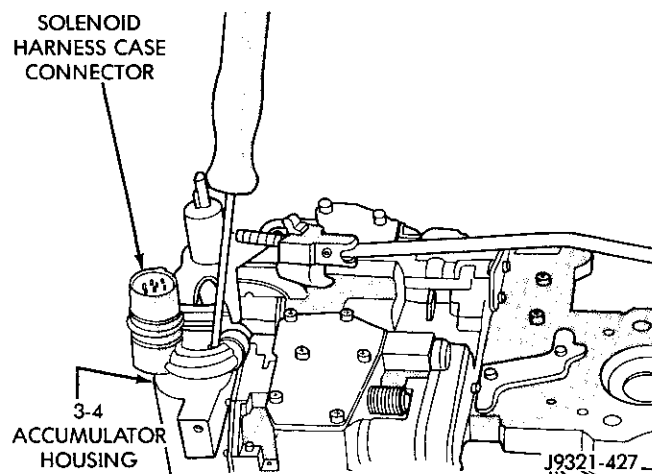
Solenoid Harness Case Connector Shoulder Bolt
